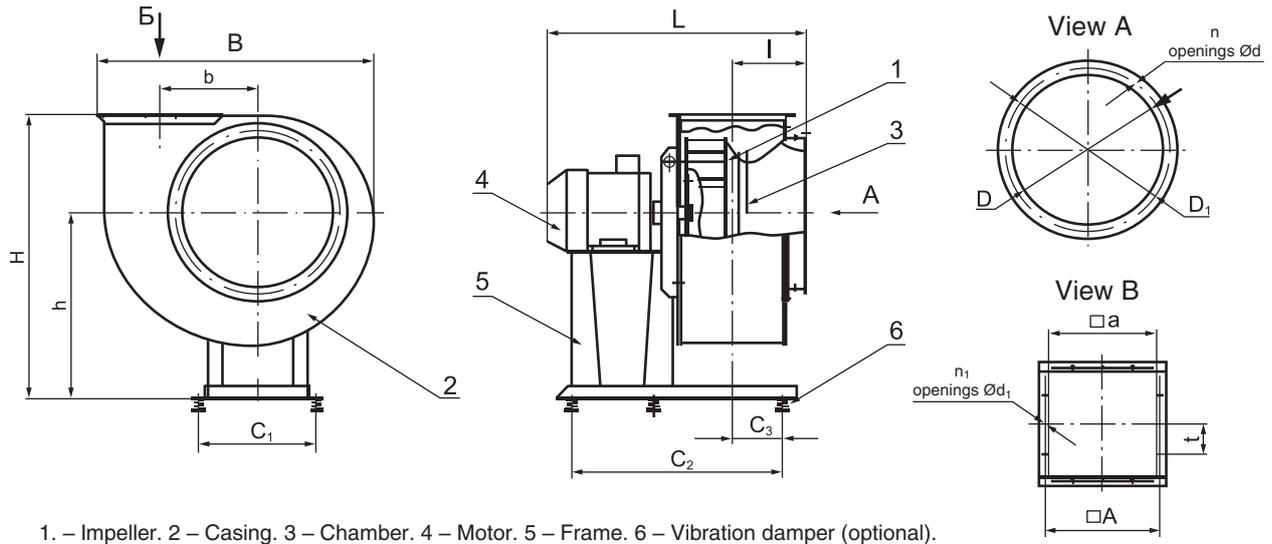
Installation, connection, and overall dimensions of fans BP-80-75-2,5 ...12,5
